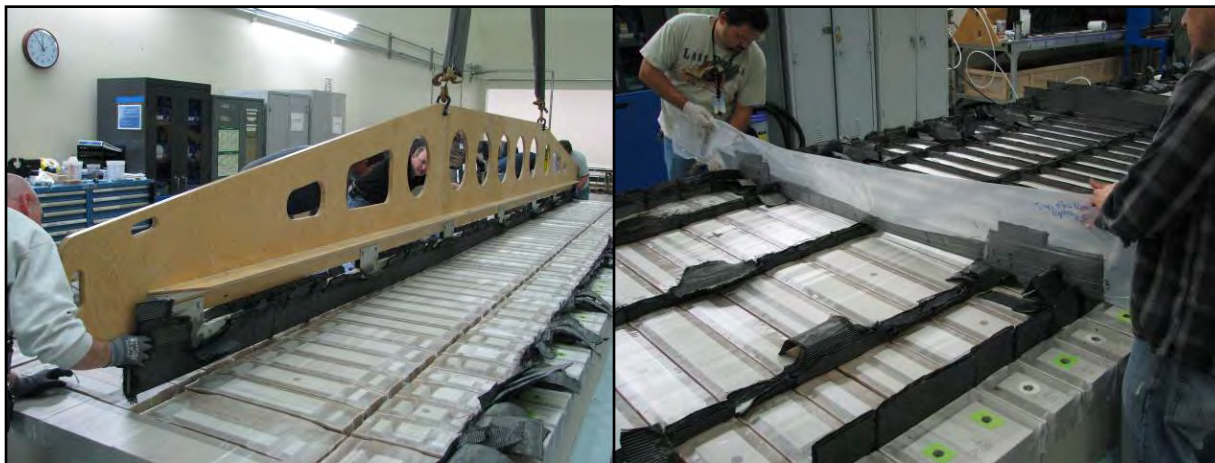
Preform Assembly Jig for Crown Panel Utilized Machined Foam IML Tool Blocks
